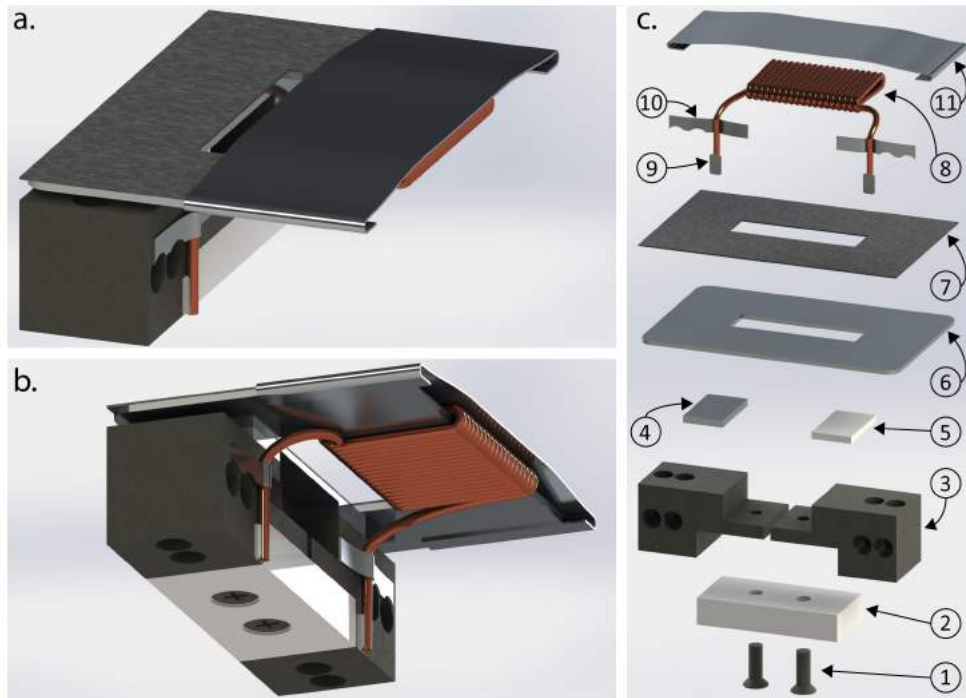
a. Three dimensional projection of the sample from above. b. Three dimensional projection of the sample from below. c. Exploded view, details in text. For scale, it must be considered that the short side of (7) is 12.5 mm.
